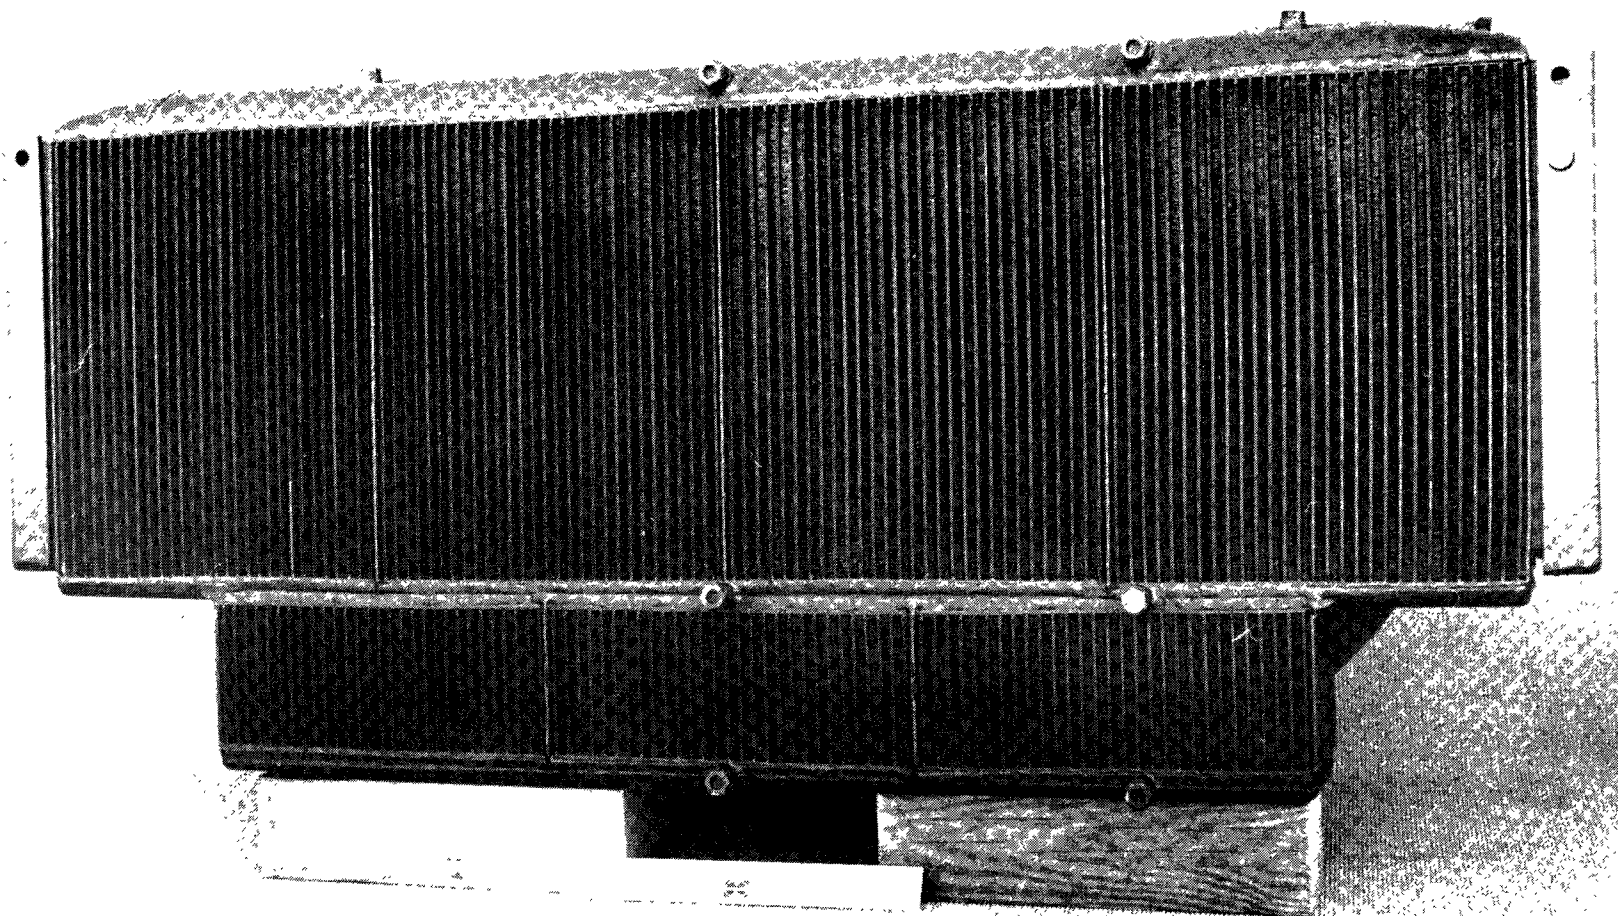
is a photograph of the front view of the completed Aerojet condenser assembly showing the core assembly. Figure 5-20 is a back view showing the inlet and outlet ducts and the condenser-to-fan shroud. Figure 5-21 is a back view of the condenser assembly showing the inlet manifold assembly. Figure 5-22 shows the final fan support frame of the condenser.
